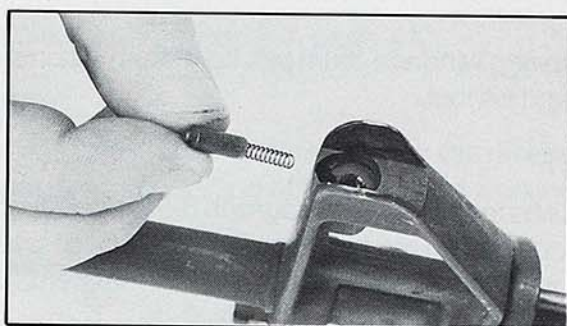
FRONT SIGHT POST DISASSEMBLY
